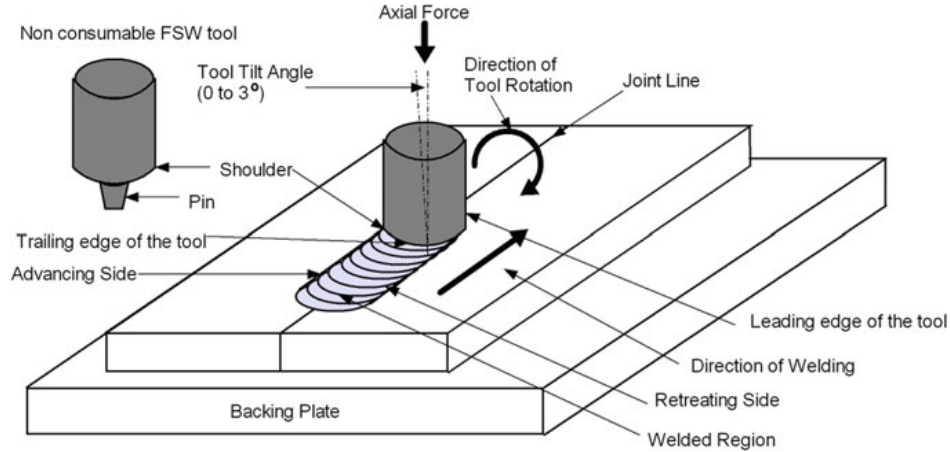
Schematic showing the setup and some terminology in friction stir welding (FSW). Image after Shettigar and Manjaiah [73].
